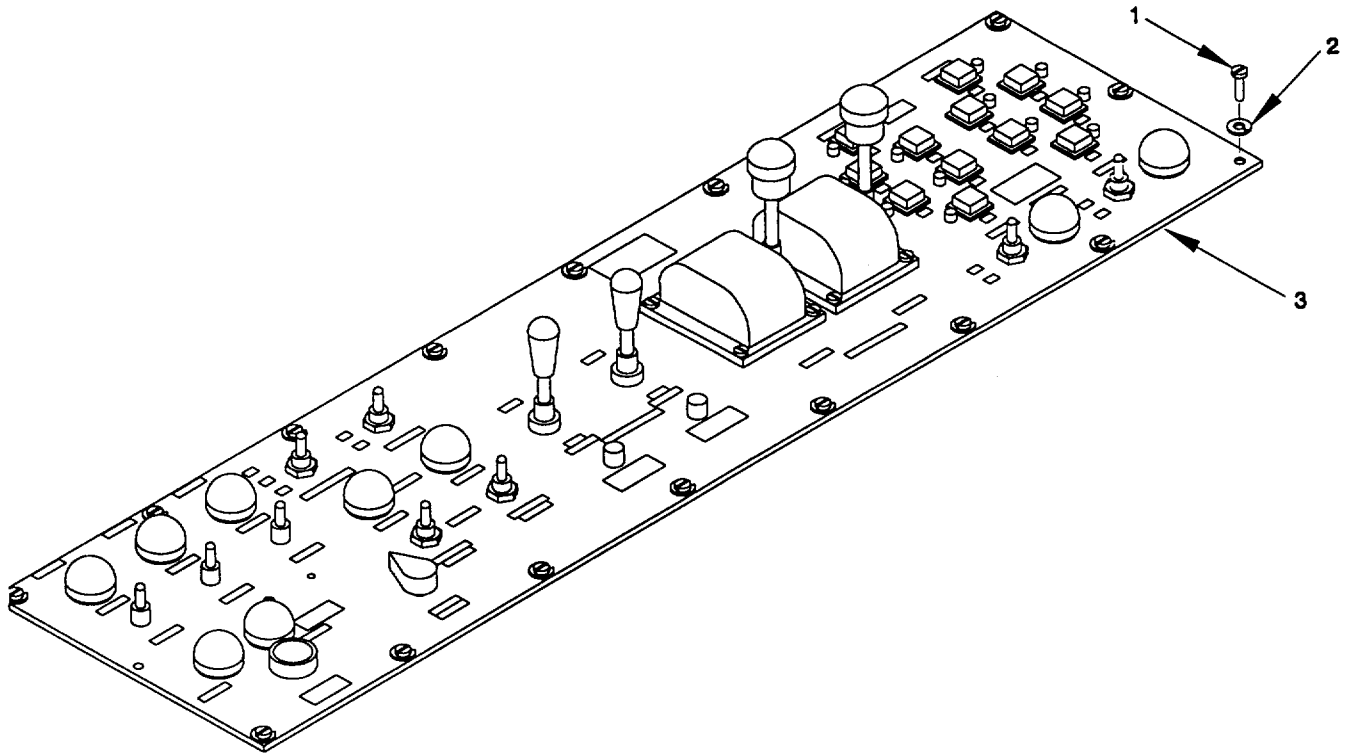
Lower Control Panel "A2", Remove/Install.
